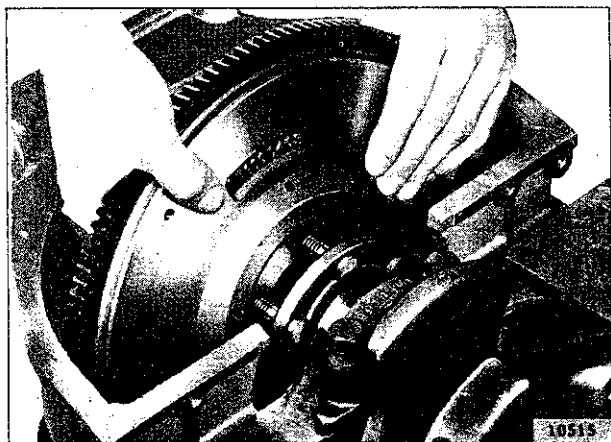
INSTALLING FLYWHEEL ON CRANKSHAFT
